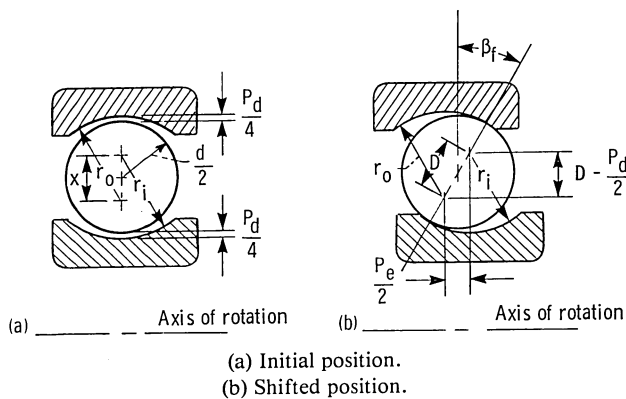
Cross section of radial ball bearing, showing ball-race contact due to axial shift of inner and outer rings. (From Hamrock and Dowson, 1981.)
